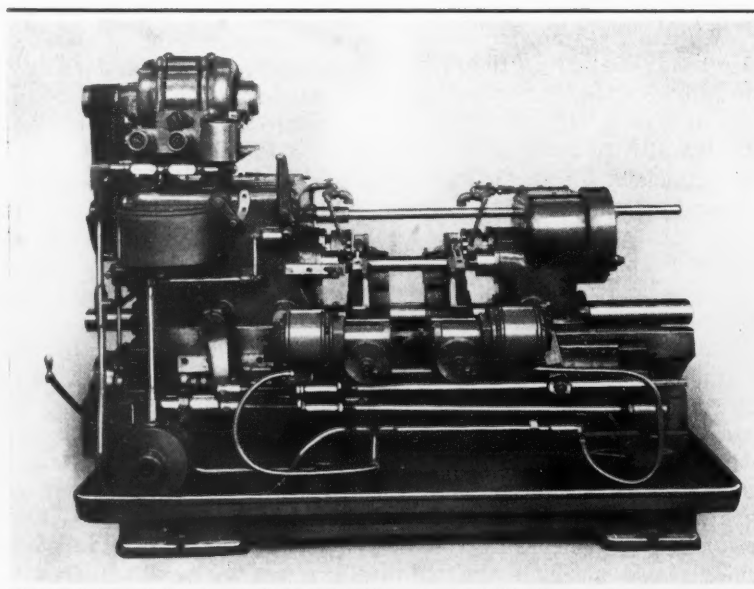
Jones & Lamson Automatic Double-end Milling and Centering Machine
